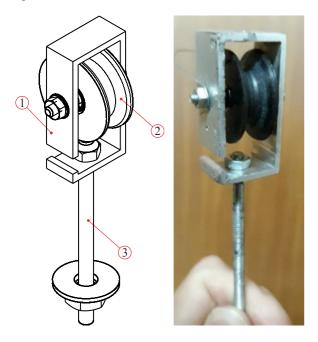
Geometrical model (left) and fabricated sample (right) of the trolley
